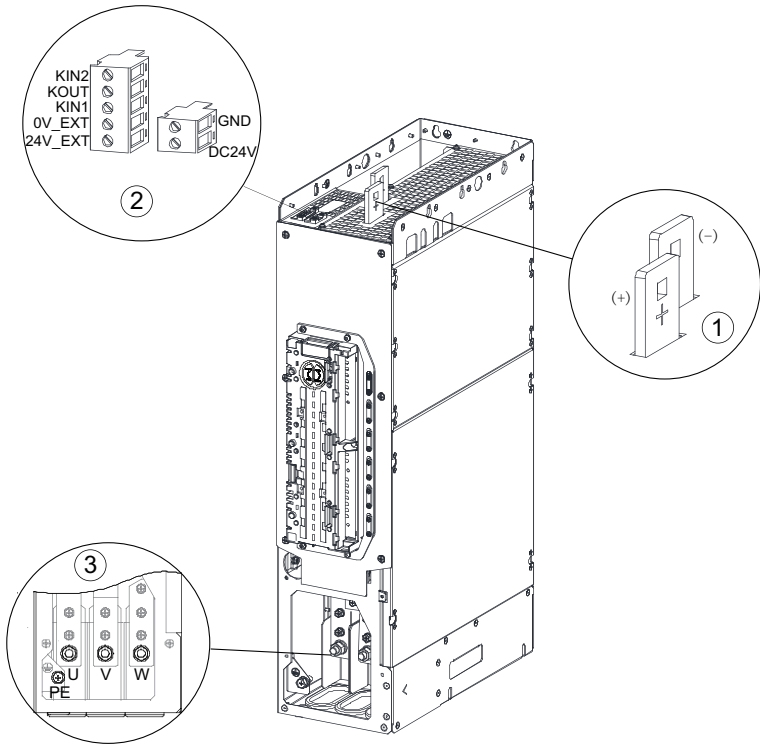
Terminal layout of H6 and H7 DC chopper modules
